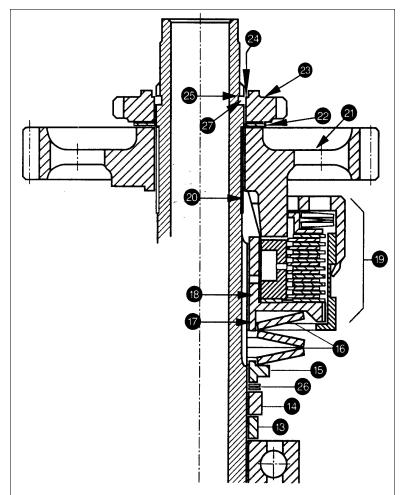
Propeller Shaft Assembly with Slipper Clutch.
